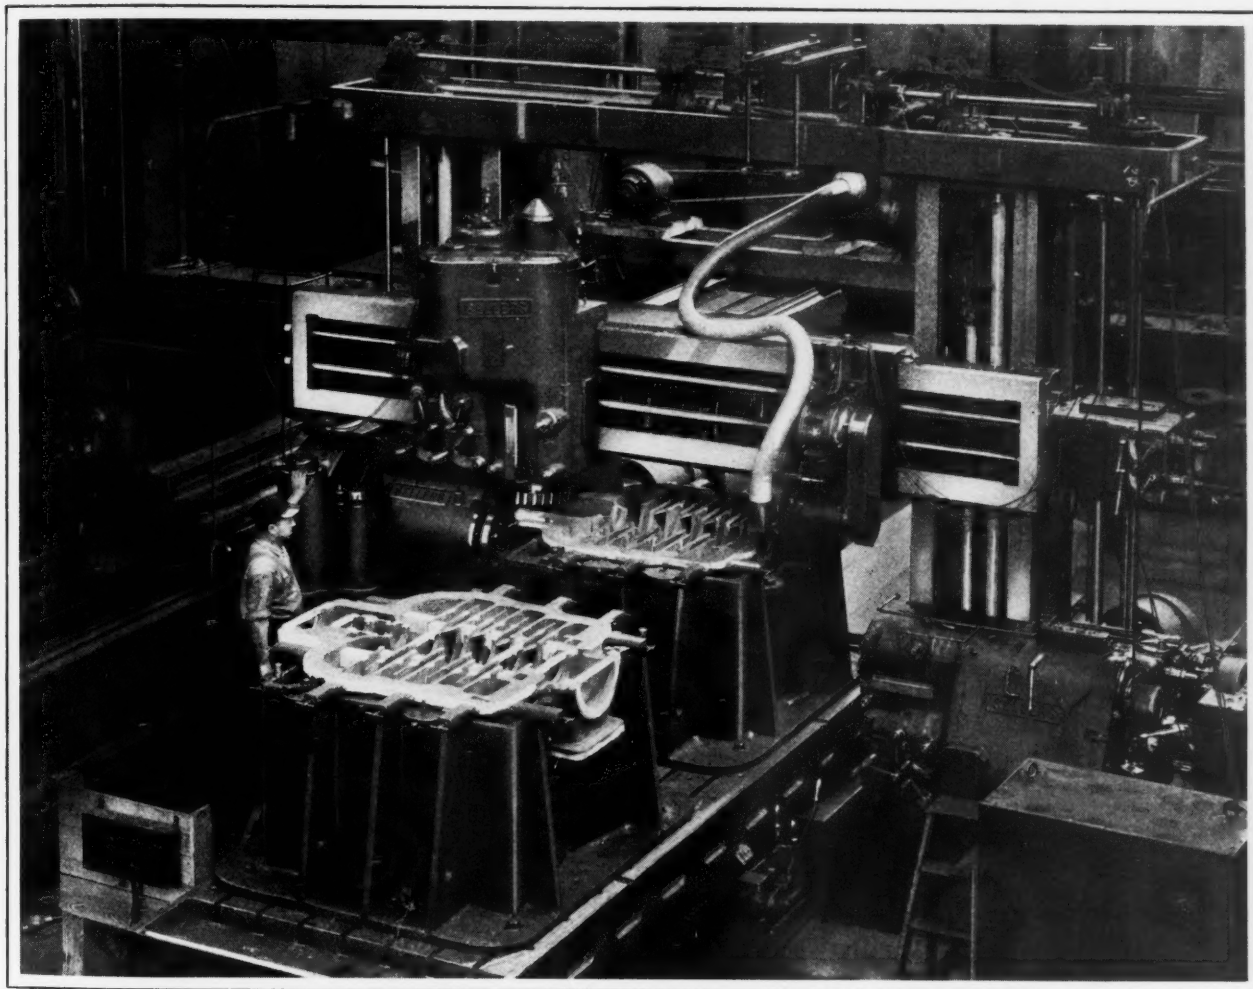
Planer-type Machine which has Enabled Pump Casings to be Simplified from Twenty-eight to Two Parts
